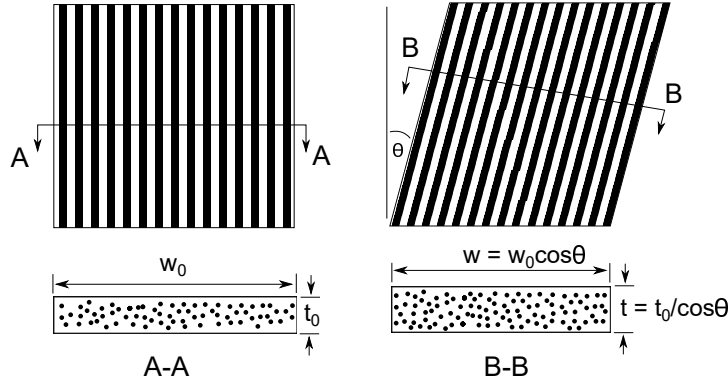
CTS tow being sheared through a shearing angle θ . Reproduced from Ref. [26].
